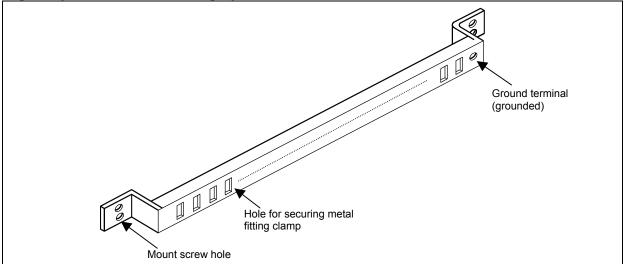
(c) Ground bar for shield clamp (outline drawing)
